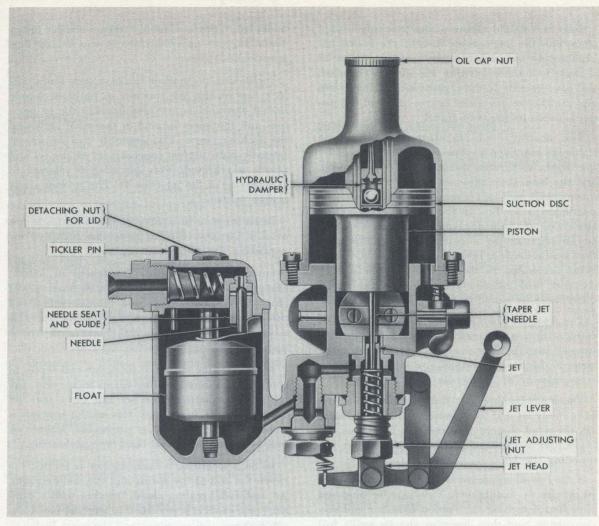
Cross Sectional View-S.U. Carburetor.
